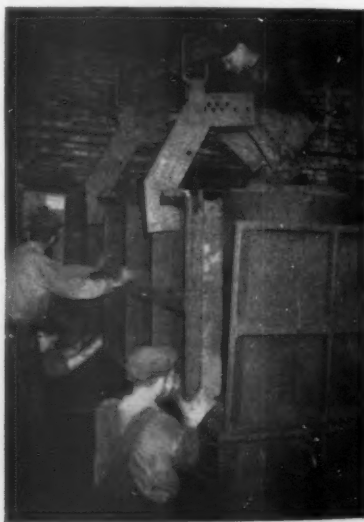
FINAL END CHEEK BEING PLACED IN POSITION.
